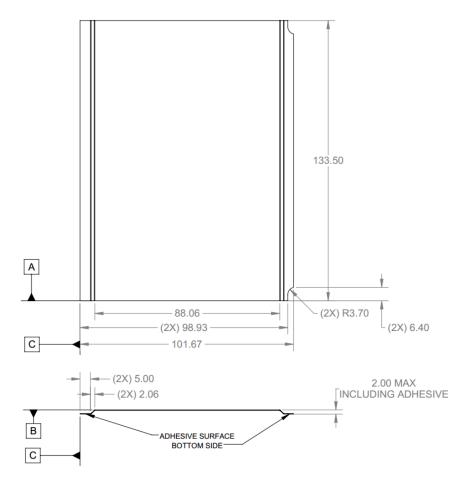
Large Card Bottom Side Insulator (Top and Side View)
